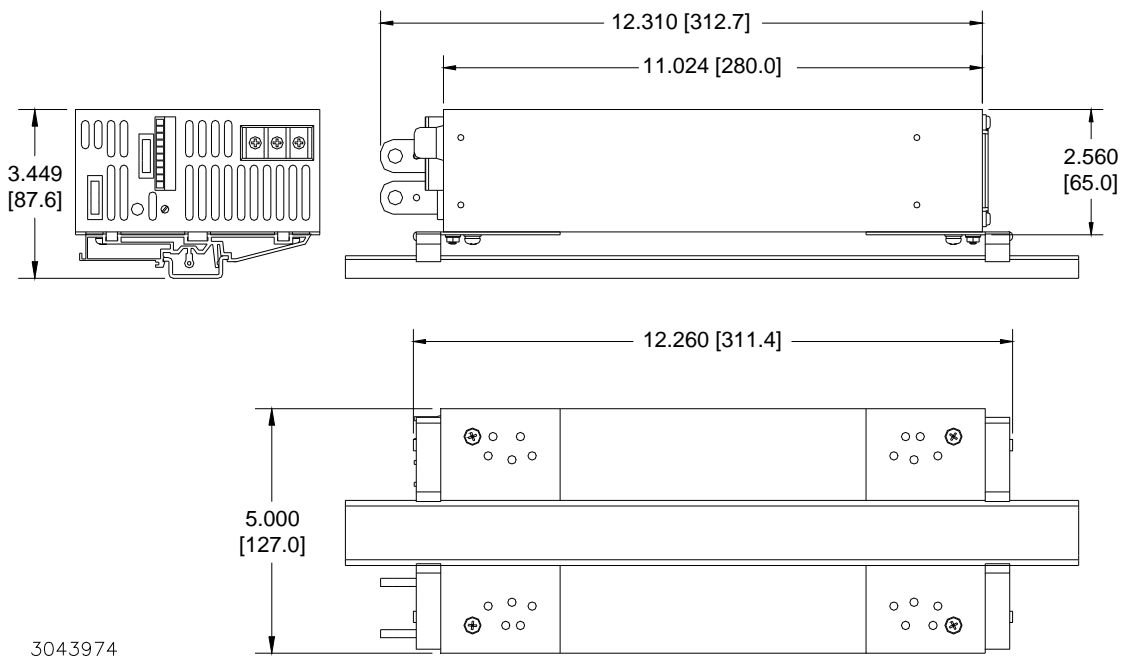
POWER SUPPLY WITH KIT INSTALLED, OUTLINE DIMENSIONS
